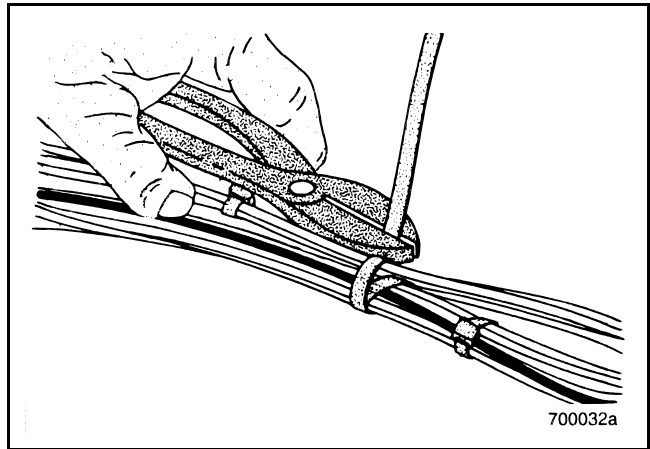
Use Proper Tool to Cut Off Excess Length of Tie Wrap
